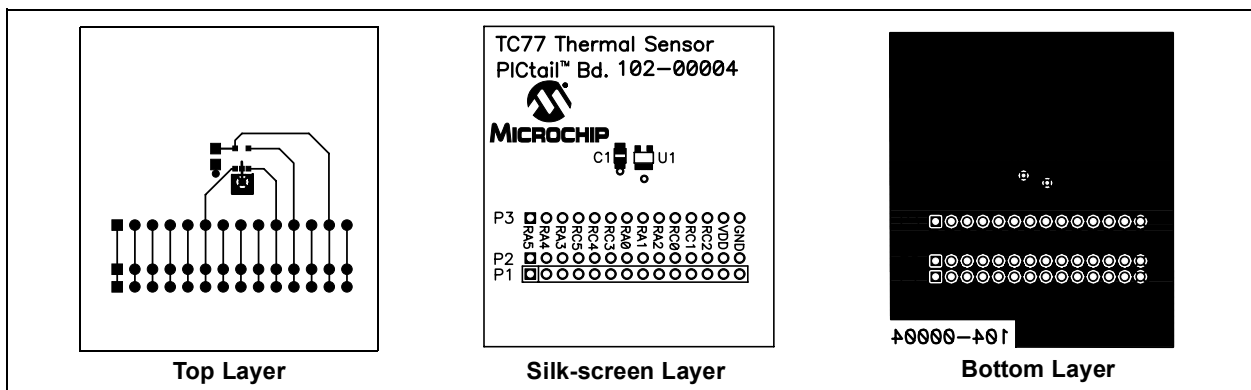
TC77 PICtail™ Daughter Board PCB Layout.
